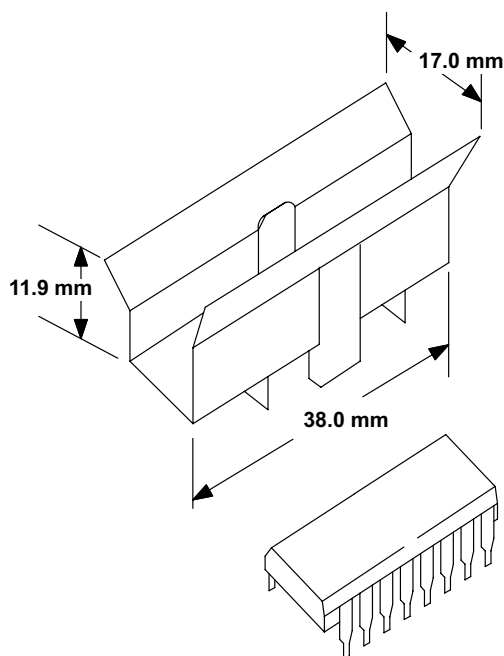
External Heat Sink Mounting Example ($\theta_{JA} = 25^\circ\text{C/W}$)
